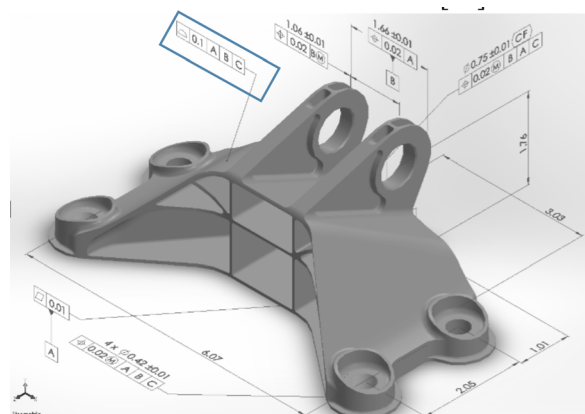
Modified part from the GE bracket design competition [64] winner [42] with GD&T tolerancing
